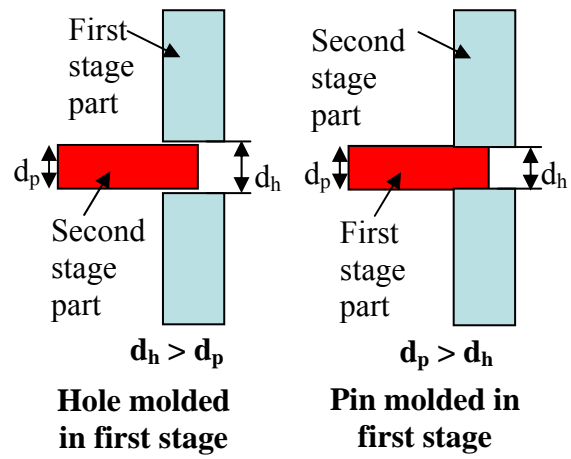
clearances in in-mold assembled Macroscale revolute joints
